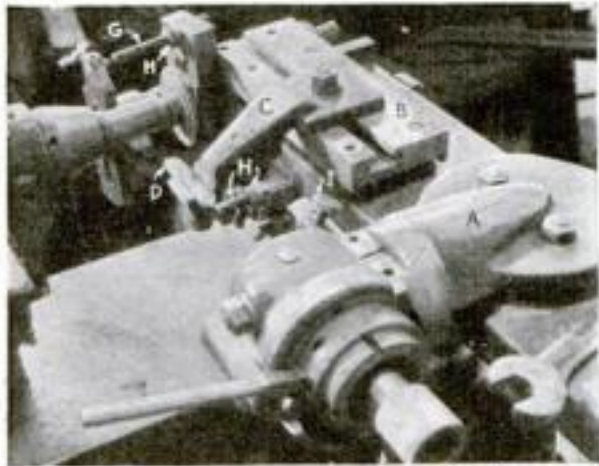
The grinder set-up and wheel-truing device used to flute center-supported taps.
